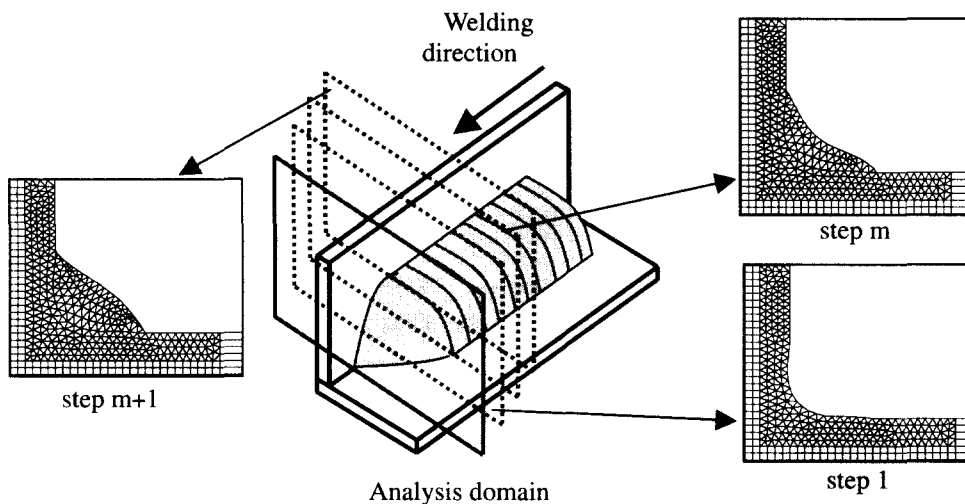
Two dimensional thermal analysis method considering the weld bead shape
